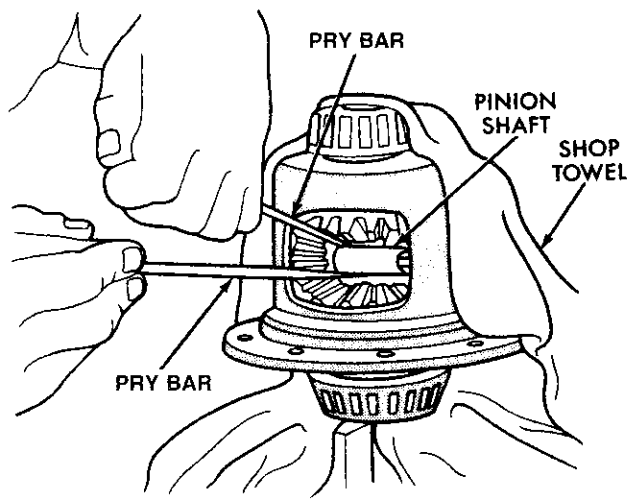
Pinion Gear Mate Shaft Retaining Ring Removal
